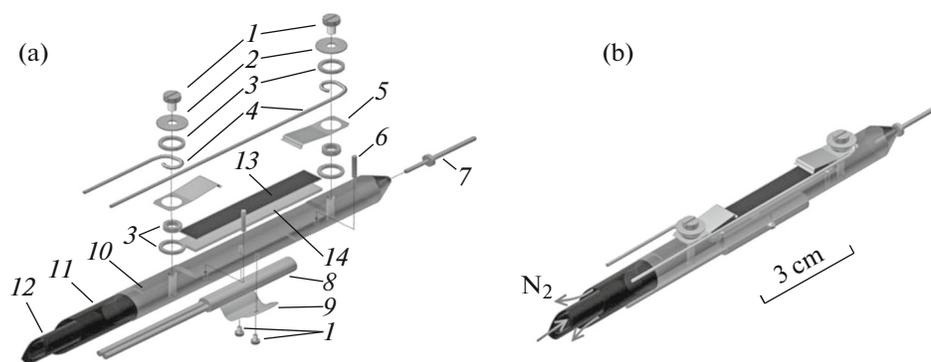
The sample holder design: (1) screw; (2) washer; (3) dielectric sleeves; (4) current lead; (5) contacts; (6) stoppers; (7) stopping element; (8) ChEP-2888 platinum thermistor; (9) attachment; (10) sample holder; (11) rod; (12) coaxial tube; (13) sample; and (14) dielectric plate.
